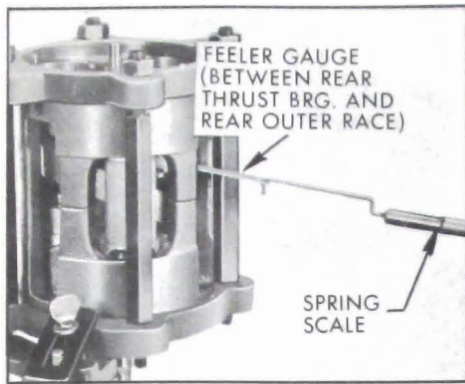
Checking Selected Feeler Gauge with Spring Scale
